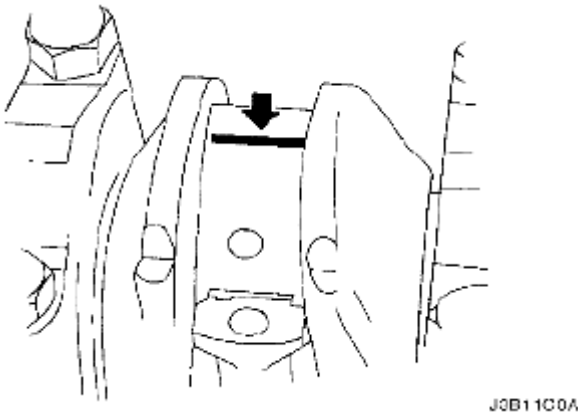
Identifying Plastic Gauging Thread At Length Of Bearing Width
